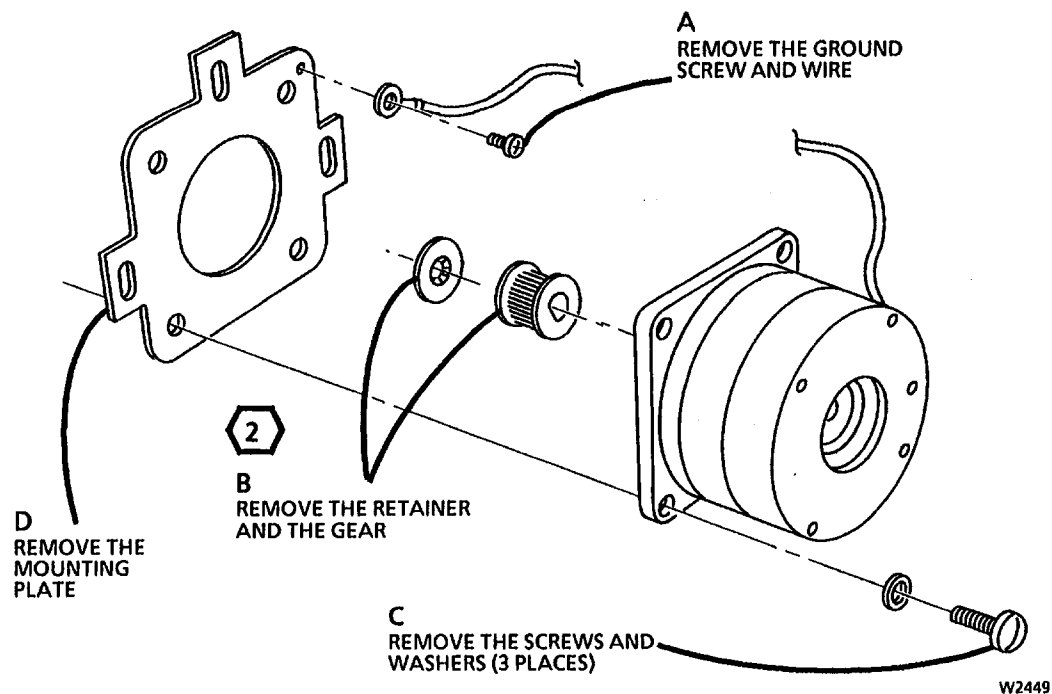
Removing the Media Transport Drive Motor from the Mounting Plate
